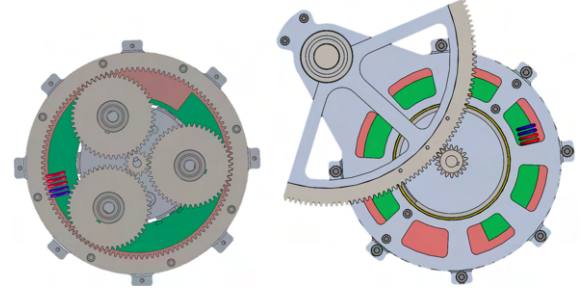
Early ARES actuator designs identified the weight could be reduced by utilizing a novel steel-aluminum mating (right) to reduce mass in comparison to conventional planetary gear systems (left).
